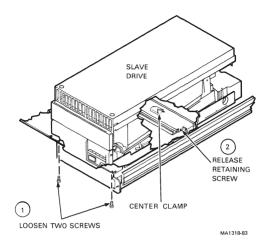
Releasing the Rackmount Component Assembly from the Chassis
